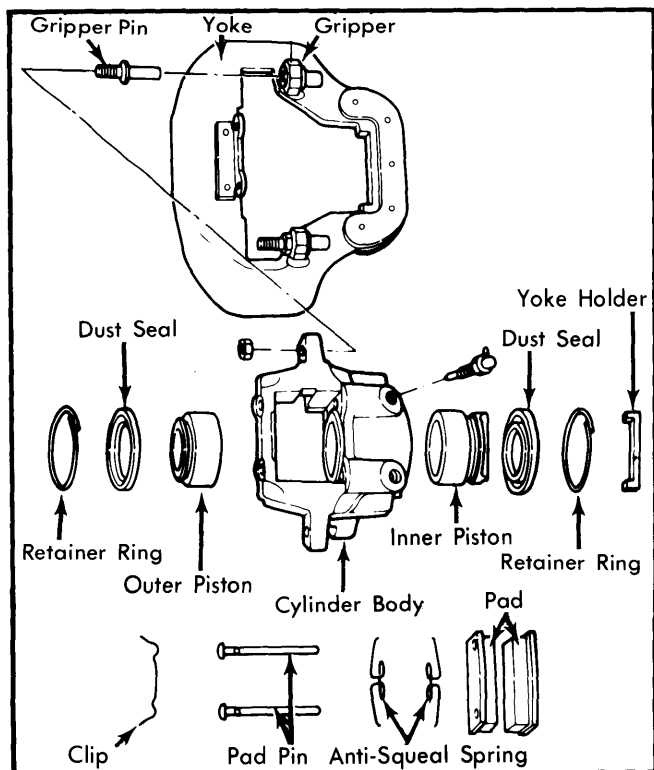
Exploded View of Front Disc Brake Caliper (510 & 810 Models)
